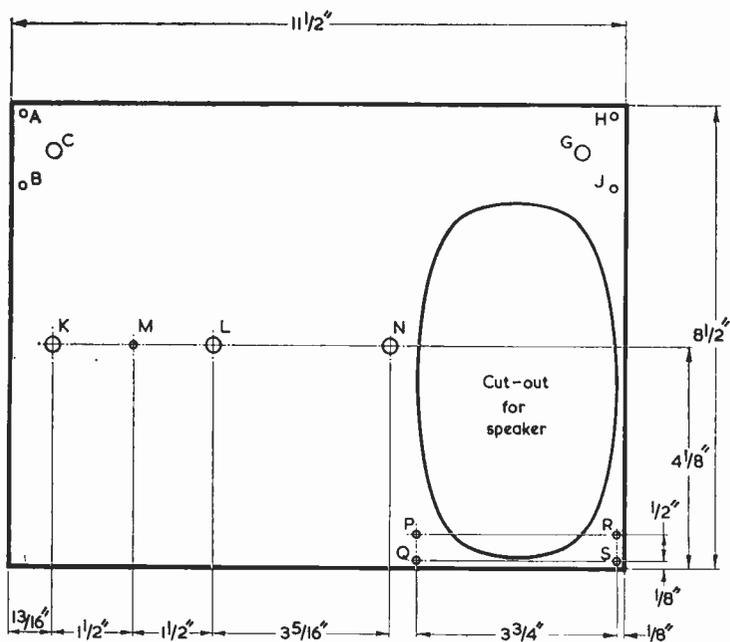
Dimensions of the plywood panel on which the components are mounted
